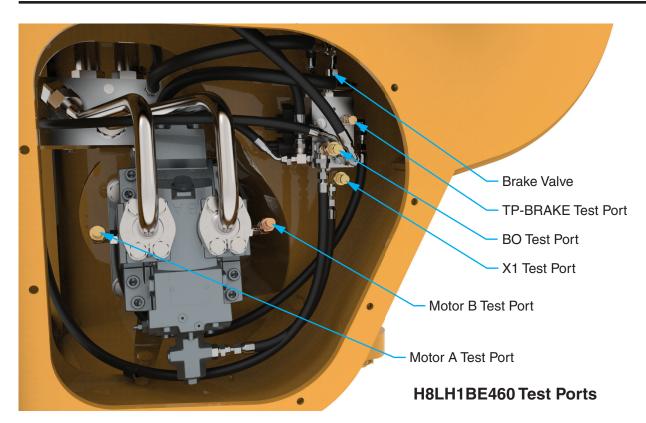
John Deere 750K/850K (E460) Installation Test Ports and Brake Valve Locations
